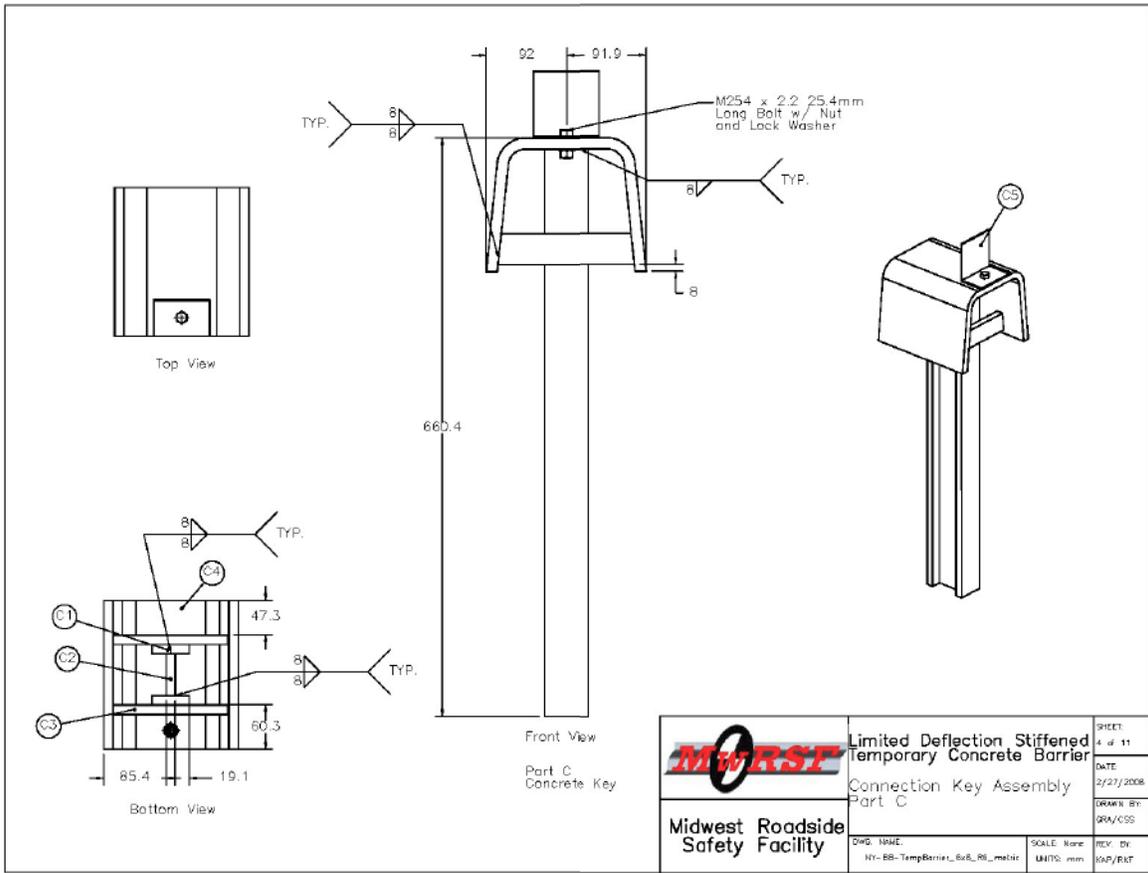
Connection Key Assembly Details, Test NYTCB-3
